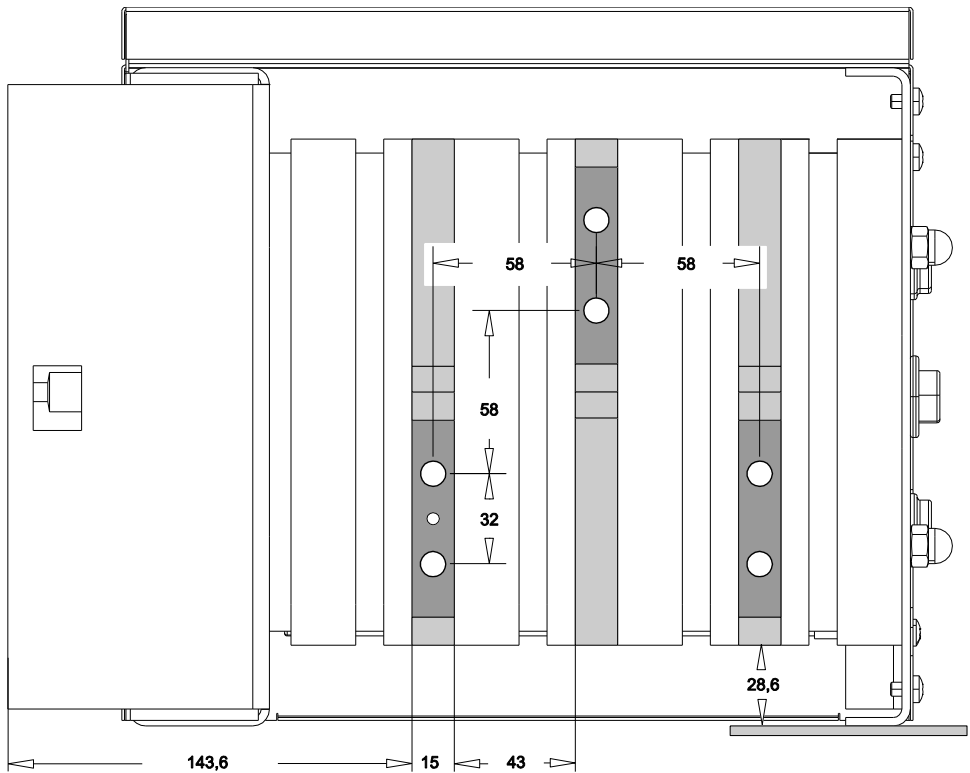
Busbar joint dimension form back side. All dimensions in millimeters.
